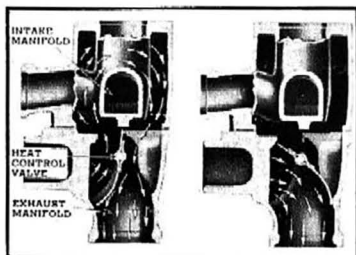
Manifold Heat Valve—6 Cyl. Engine
